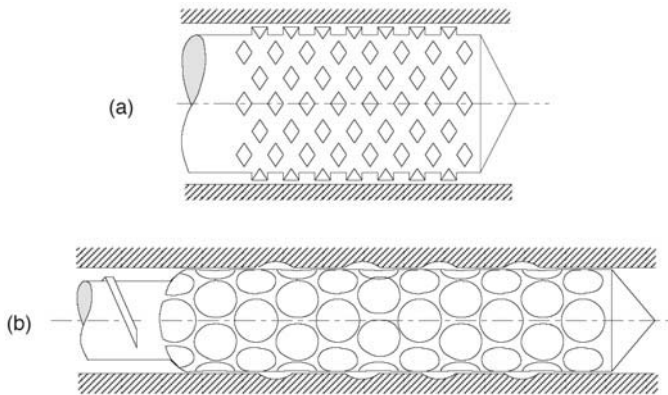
Distributive mixing sections: (a) Pineapple mixing section, (b) Cavity transfer mixing section.
